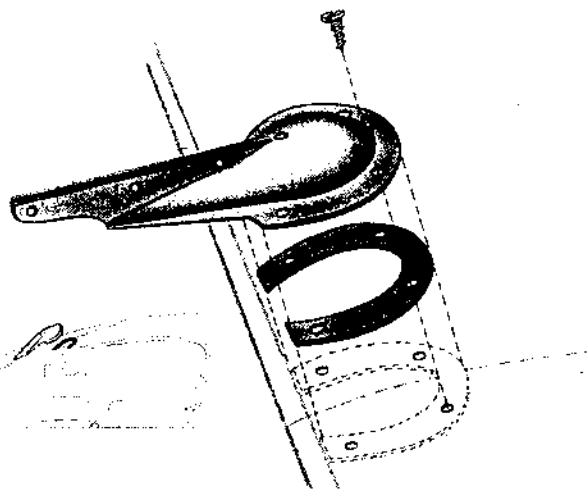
Sketch Showing Bracket Attaching Screw Hole Locations in the Roof
